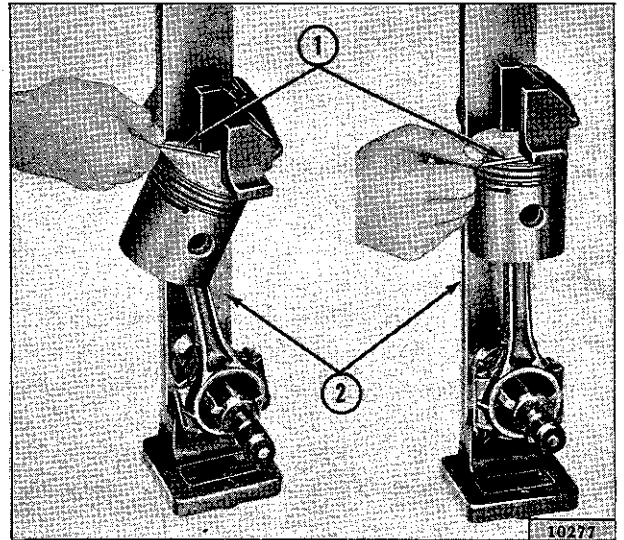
CHECKING PISTON AND CONNECTING ROD ALIGNMENT
